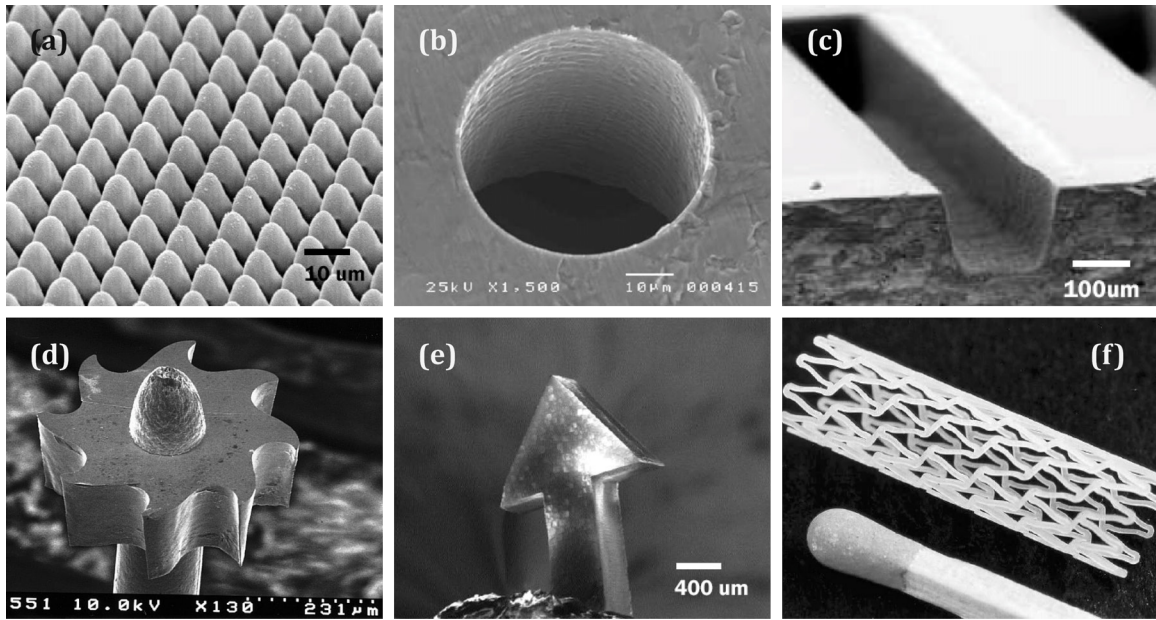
a) Surface patterning using an excimer laser [13]. (b) A $52\mu\text{m}$ diameter hole drilled through stainless steel using a copper vapor laser (CVL) [16][17]. (c) Micro-trench machined into PMMA using femtosecond laser [18]. (d) Nickel micro-turbine motor (outside diameter is $470\mu\text{m}$ and height is $150\mu\text{m}$) fabricated using Laser-LIGA [19]. (e) Silicon wafer micromachined using nanosecond laser [13]. (f) A medical stent micromachined from a biodegradable polymer using a femtosecond laser [18].
